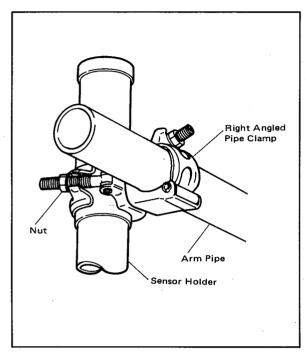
Sensor Holder Removal (Pipe Mounting Type).
